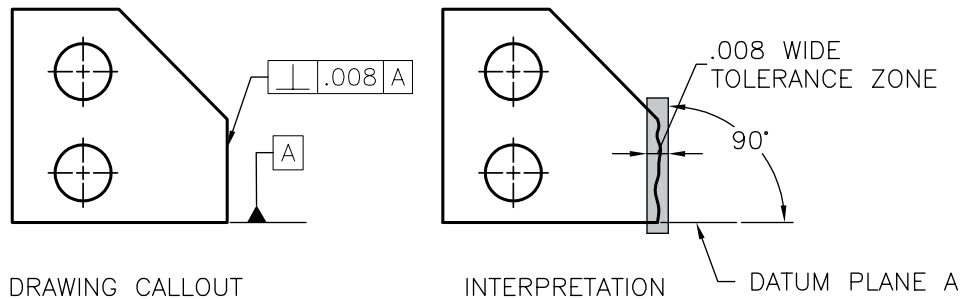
Perpendicularity tolerance applied to a flat surface
